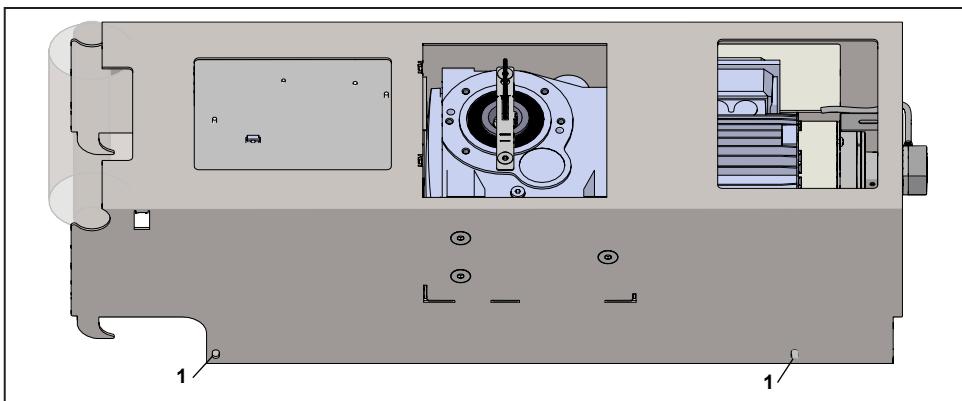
Modular drive system mounting hardware in canopy
